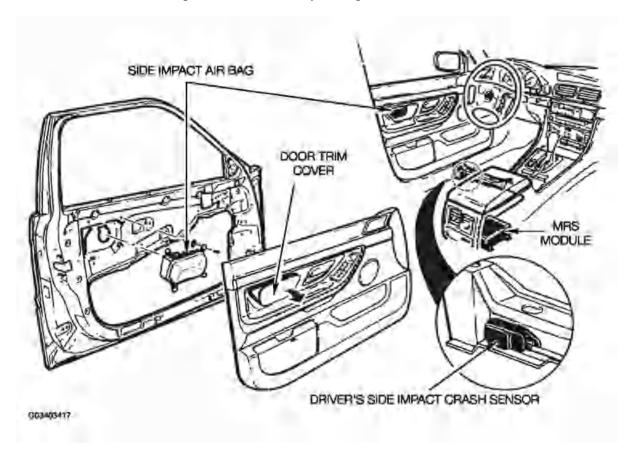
Locating Side Air Bag Assembly (Front/Rear) Courtesy of BMW OF NORTH AMERICA, INC.
